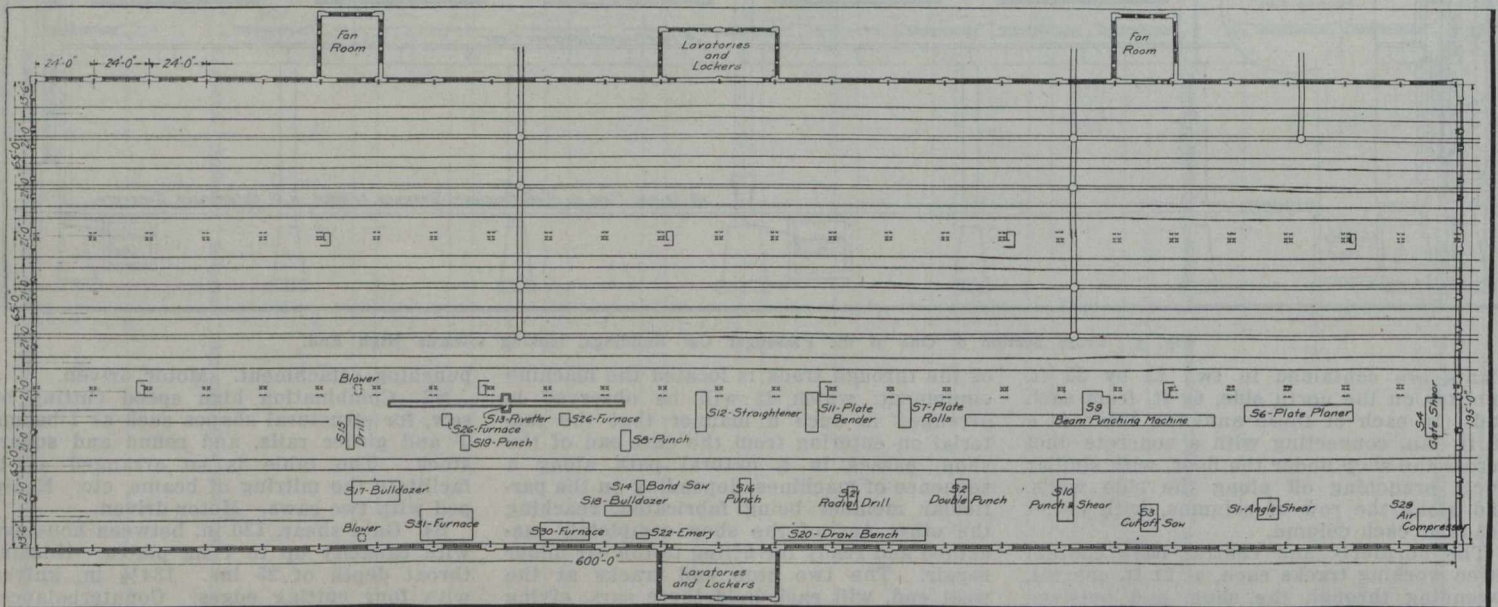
Plan of Freight Car Shop, showing Machine Tool Layout in the Steel Car Shop Section.
